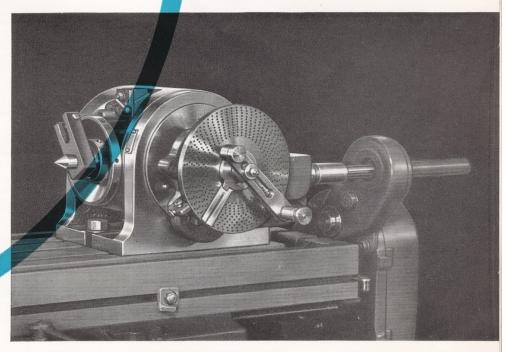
Sub-Assemblies of the Dividing Head and Mitre Gear Bearing (Mitre Gear Bearing is for connection to open type Driving Mechanism—Figure 16)
